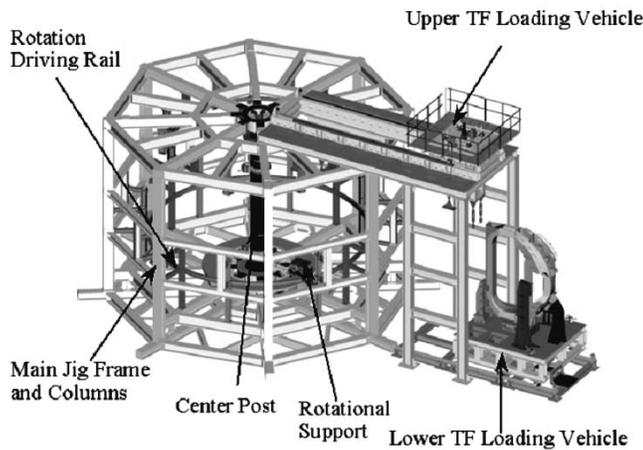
Schematic 3-D view of main jig system for TF assembly.
